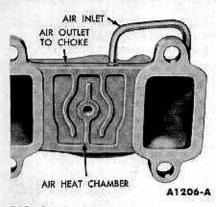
Automatic Choke Air Heat Chamber—352 Engine
